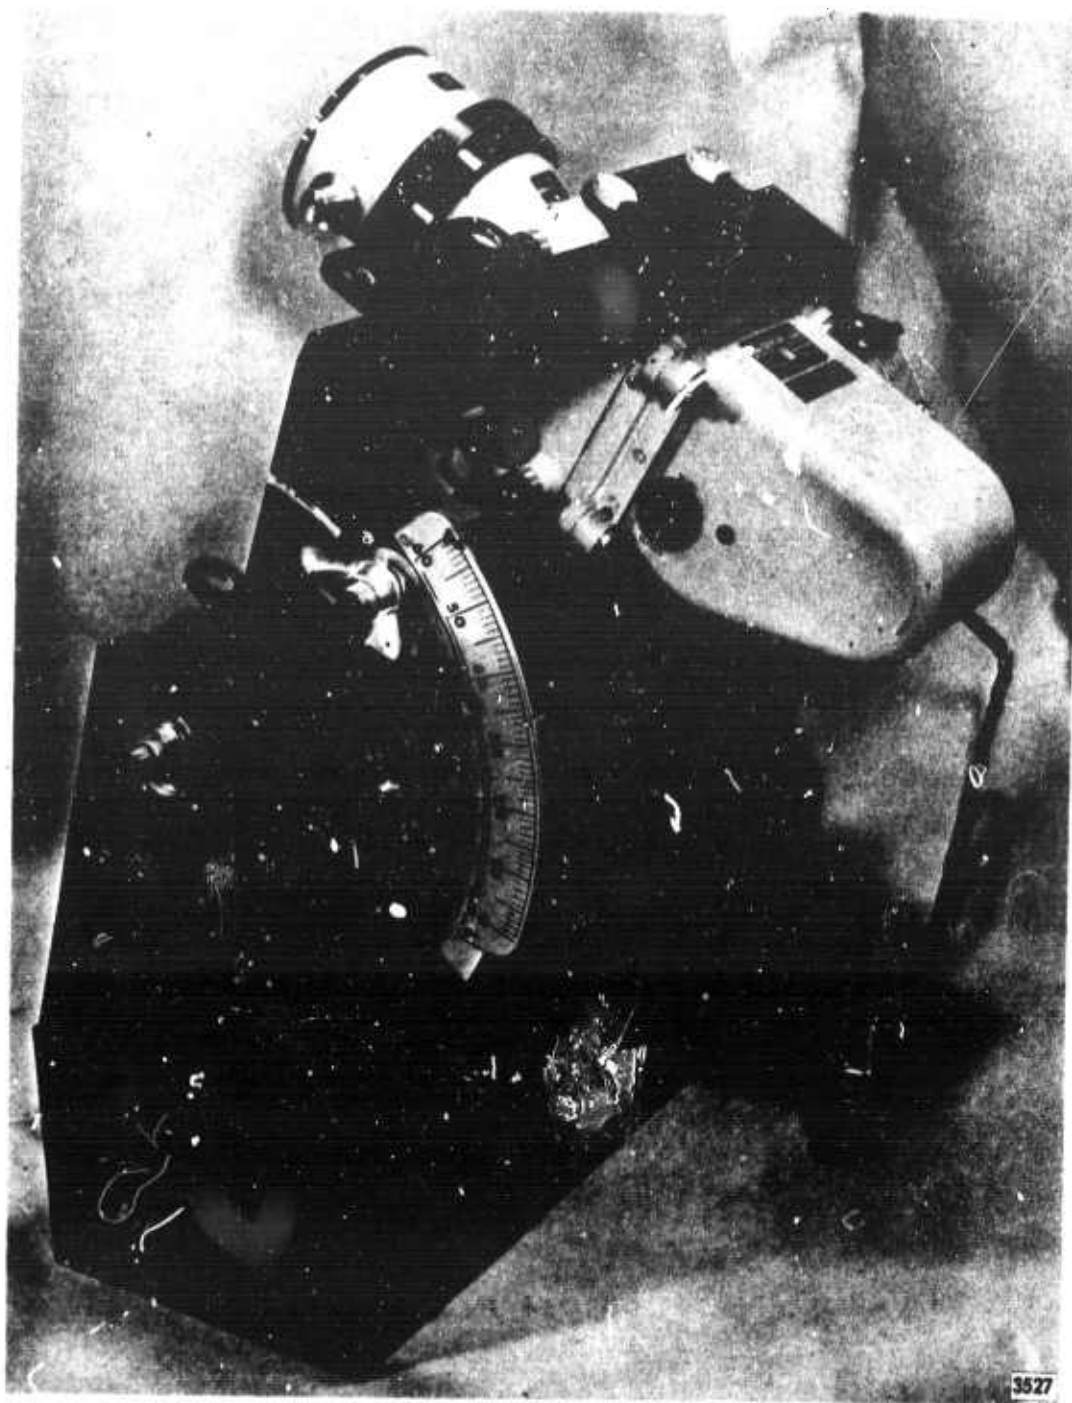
MOUNTING FIXTURE FOR KB-8A CAMERAS
